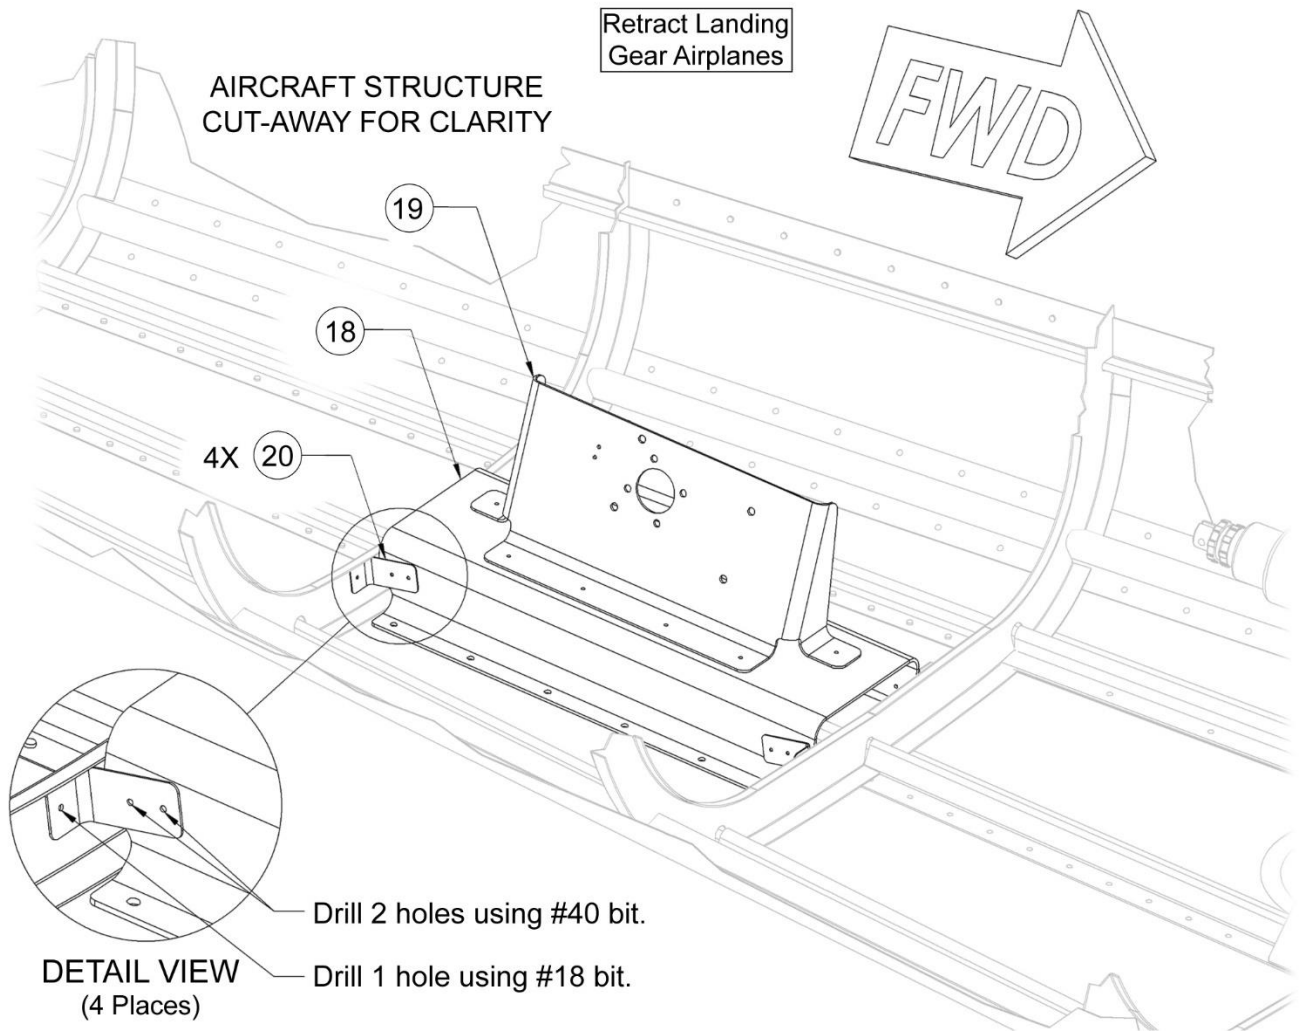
Drilling Holes for Pitch Servo Shear Clips
